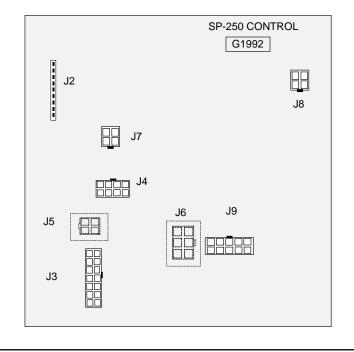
Wiring Harness and Molex Plug Locations.
